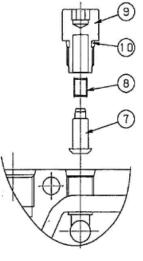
Check valve (Swing & boom swing, dozer, arm 3 & boom 3, service, arm, boom, bucket, arm 2)
